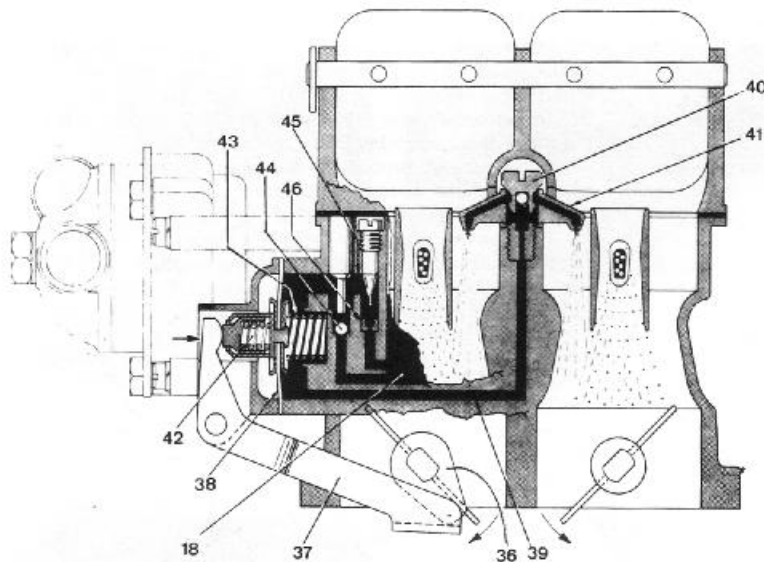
Carburettor acceleration phase (Sec 3)
